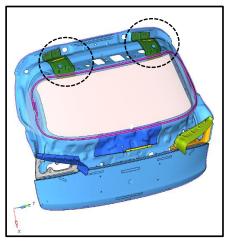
Bridge type hinge bracket which is assembled with adhesive to outer sheet metal
